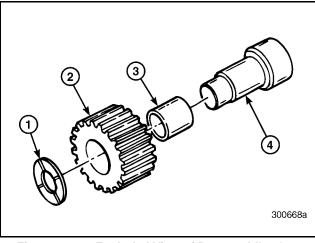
Exploded View of Reverse Idler Gear Assembly
